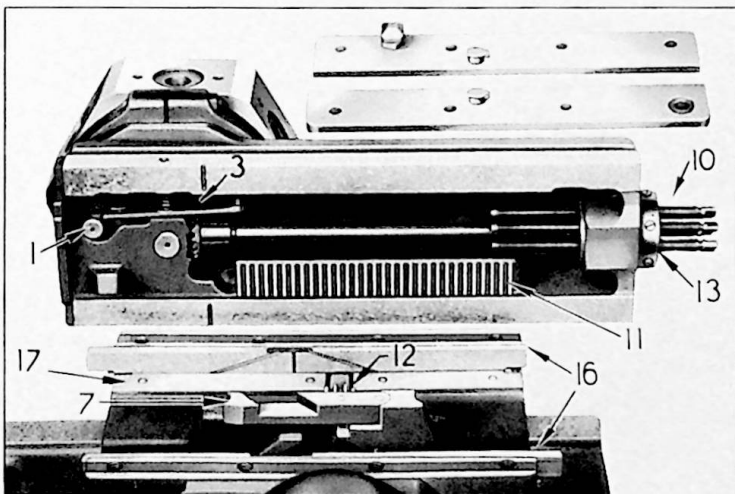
Bottom of Turret Slide—No. 2 Machines.
